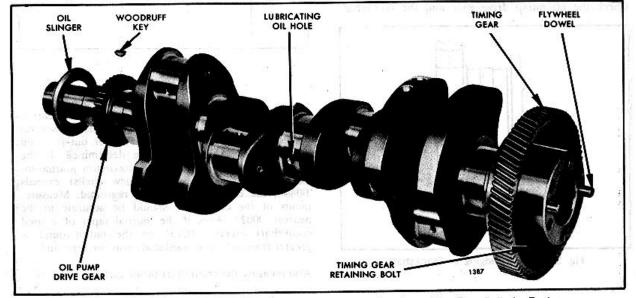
Typical Crankshaft, Timing Gear and Oil Pump Drive Gear Assembly-Four Cylinder Engine
